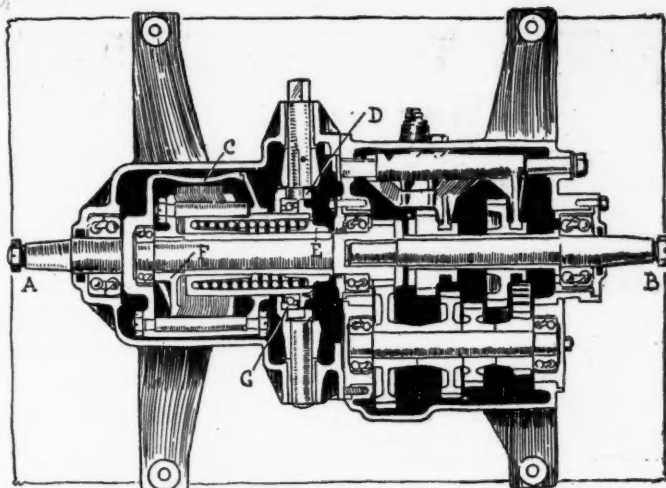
Mounting of ball thrust in multiple-disk clutch
